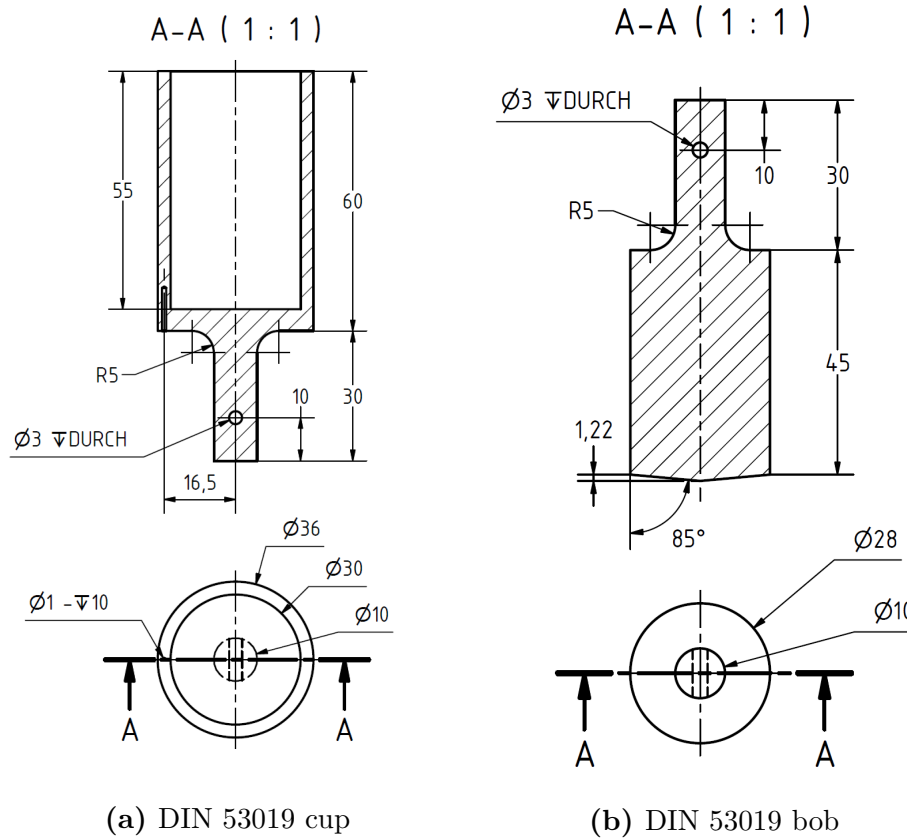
Technical drawings of the cup (a) and bob (b) used in this study
